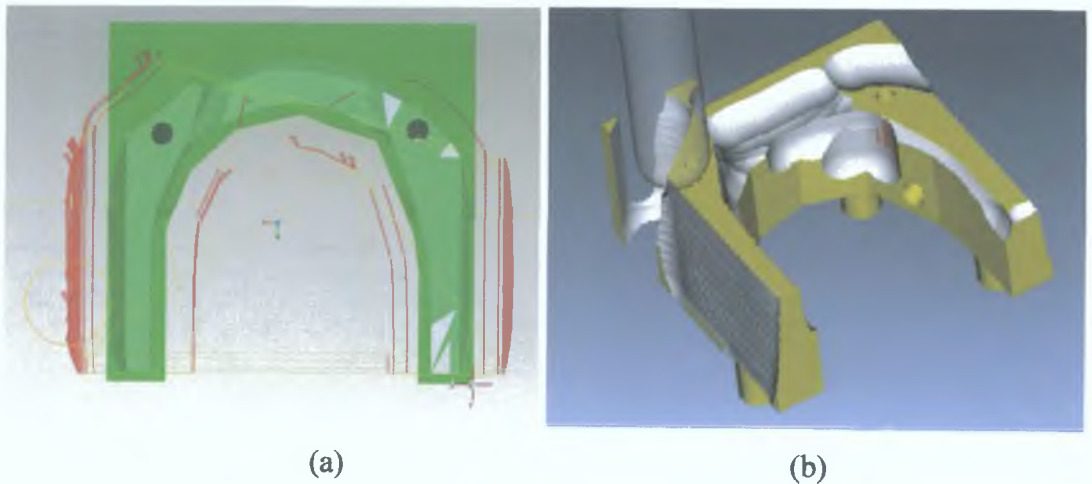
Profile Mill Sequence 2 (a) ProEngineer Tool Path. (b) NC Tool Path.
